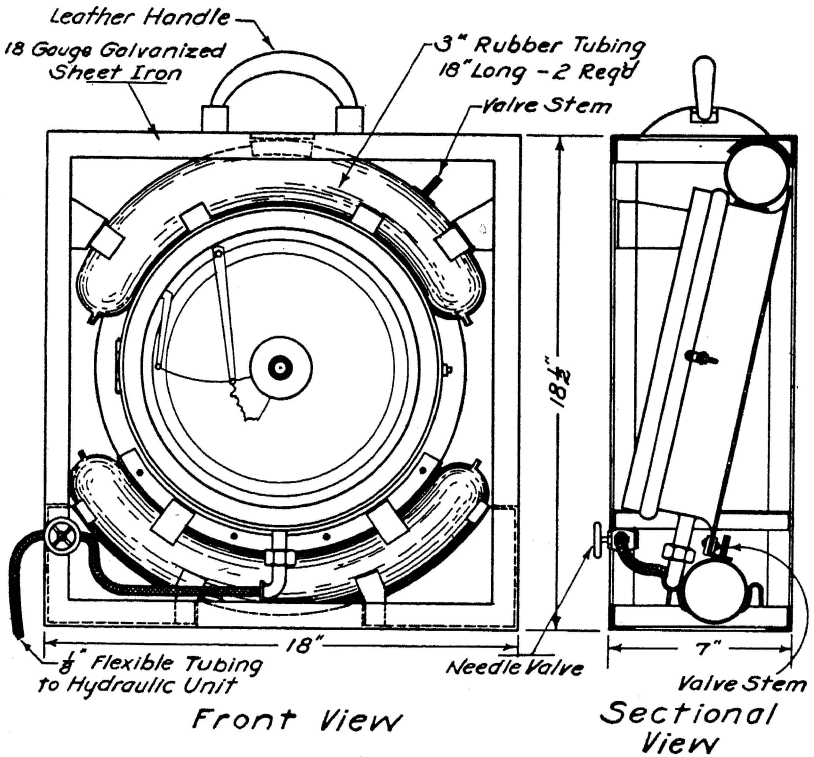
Diagrammatic Drawing of Pneumatic Mounted Recorder.
